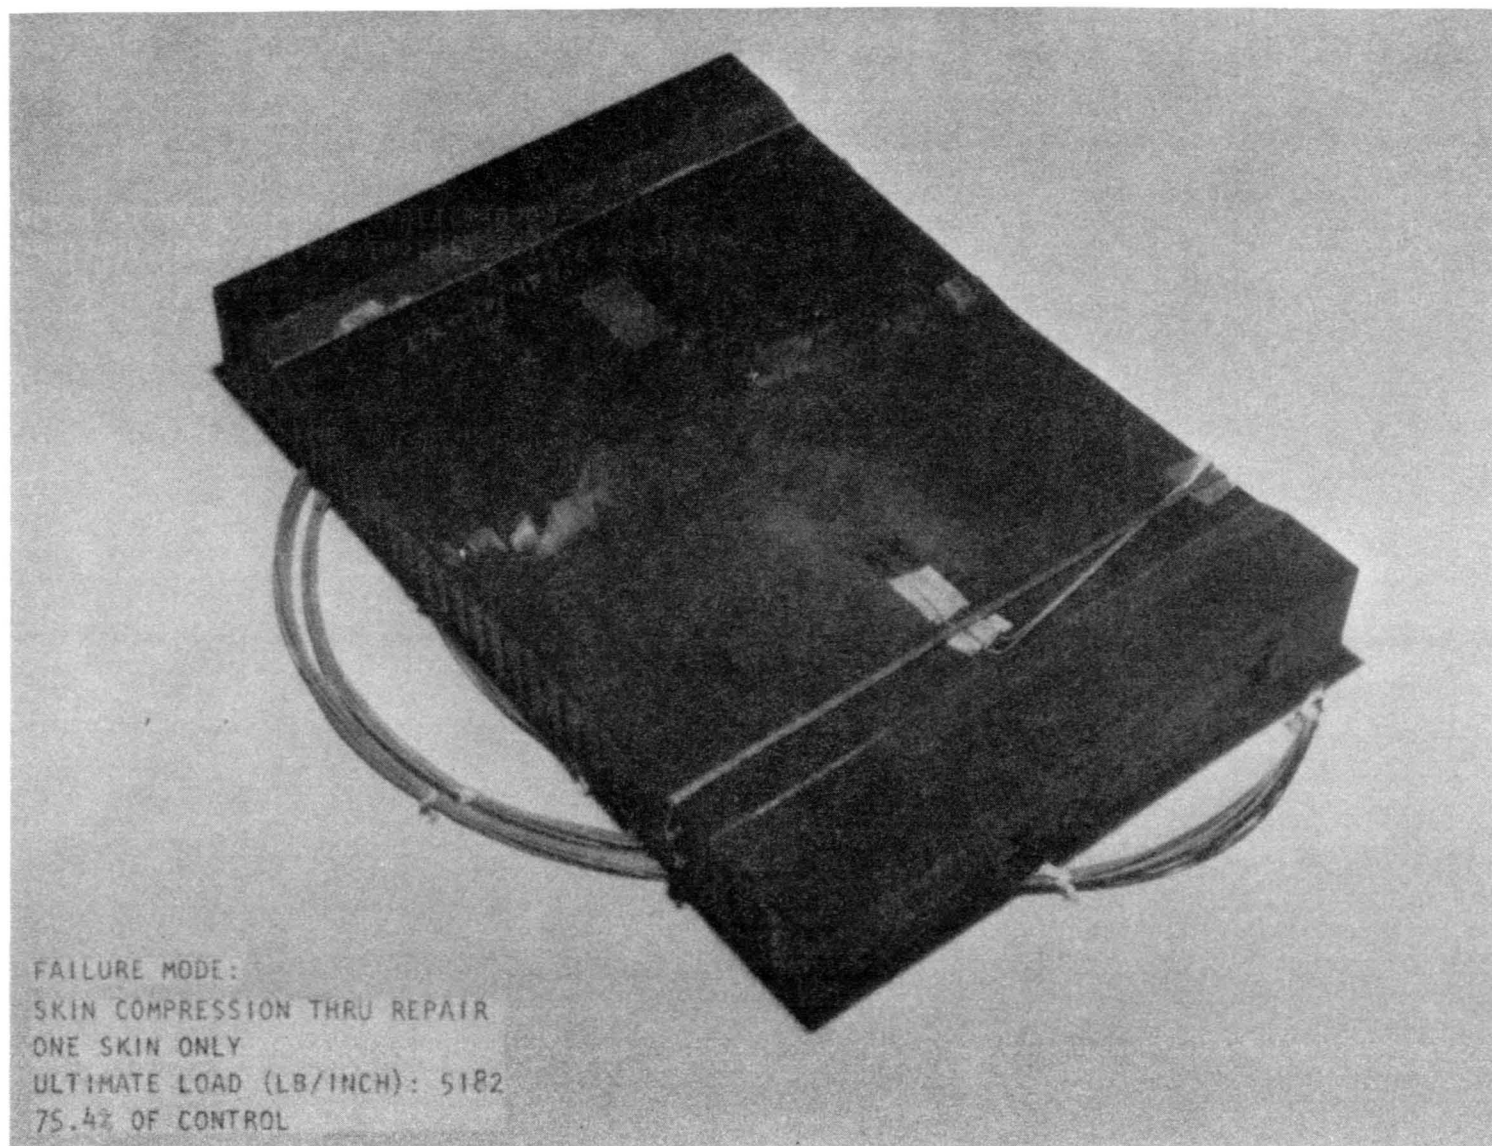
Heavily Loaded Sandwich Specimen Repair EX478/484-1--Failure Mode
